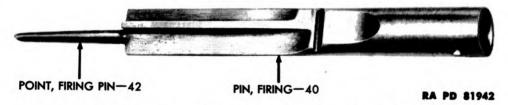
Firing Pin Assembly of Remington Rifle, Cal. .22, Model 513T
